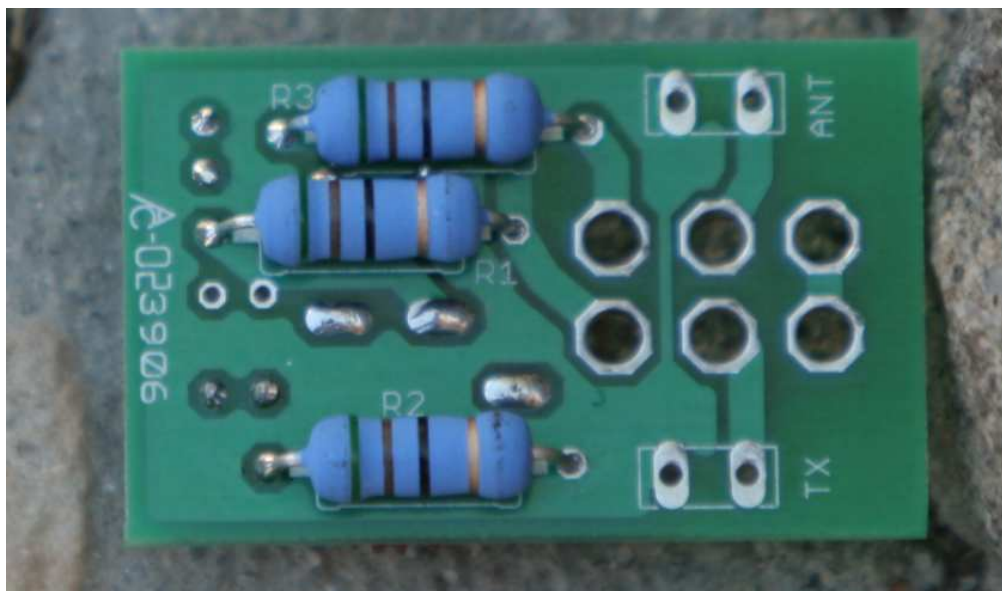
Three 51 ohm power resistors mounted on the bottom side of the PC board
